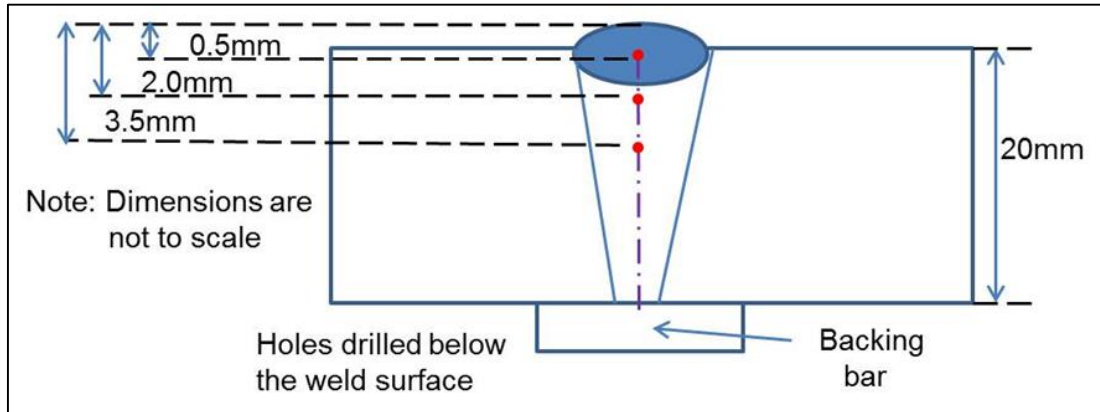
Sketch showing thermocouple positions in weld metal cross-section
